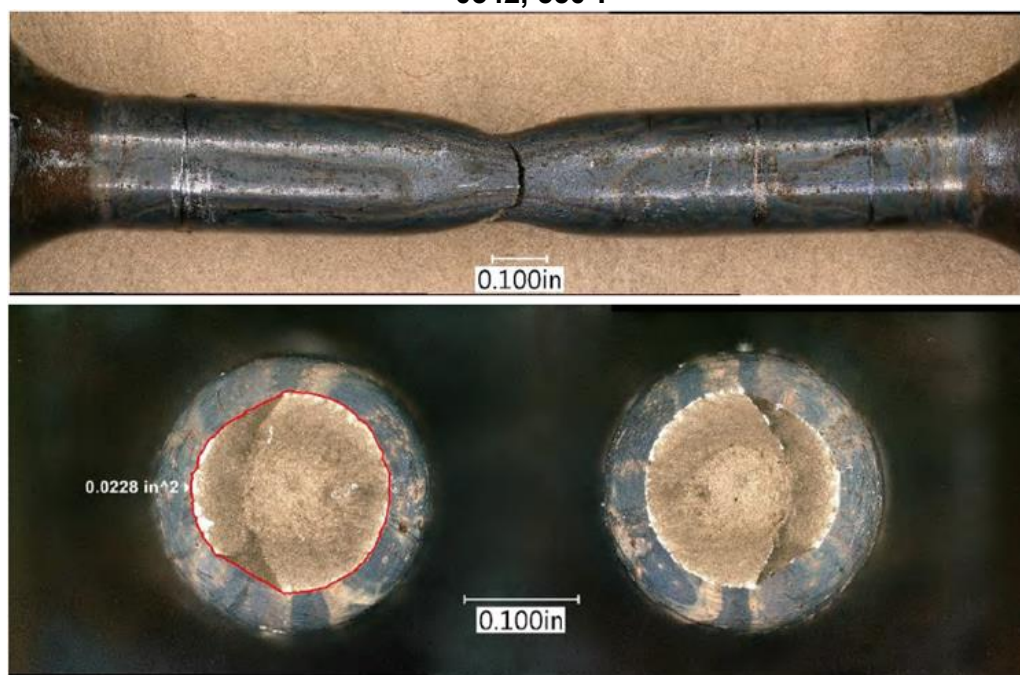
Photographs of Tested Tension Test Specimen QW-17 and Corresponding Fracture Surfaces – Weld Metal, Wire Heat 5P6771/Flux Lot 0342, 550°F
